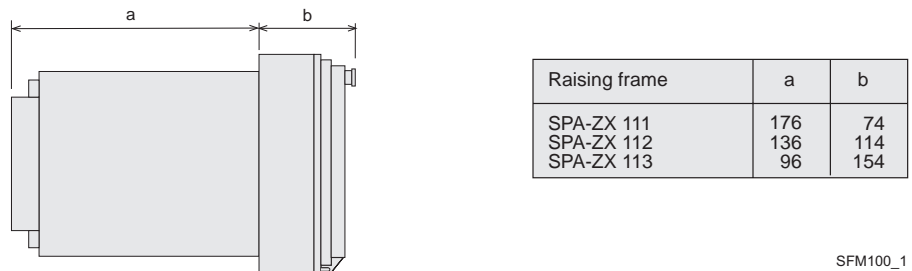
Semi-flush mounting relay case (dimensions in mm)
